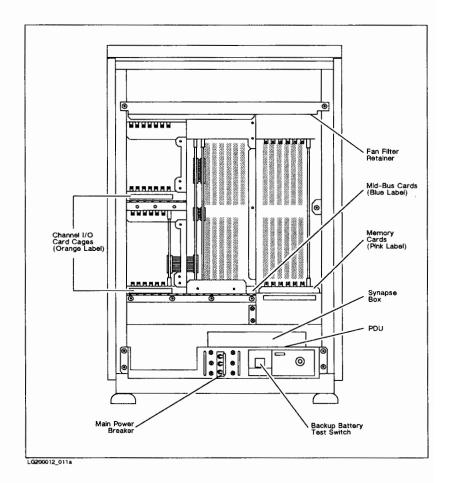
Cabinet, Rear View (Door and Card Cage Covers Removed)
